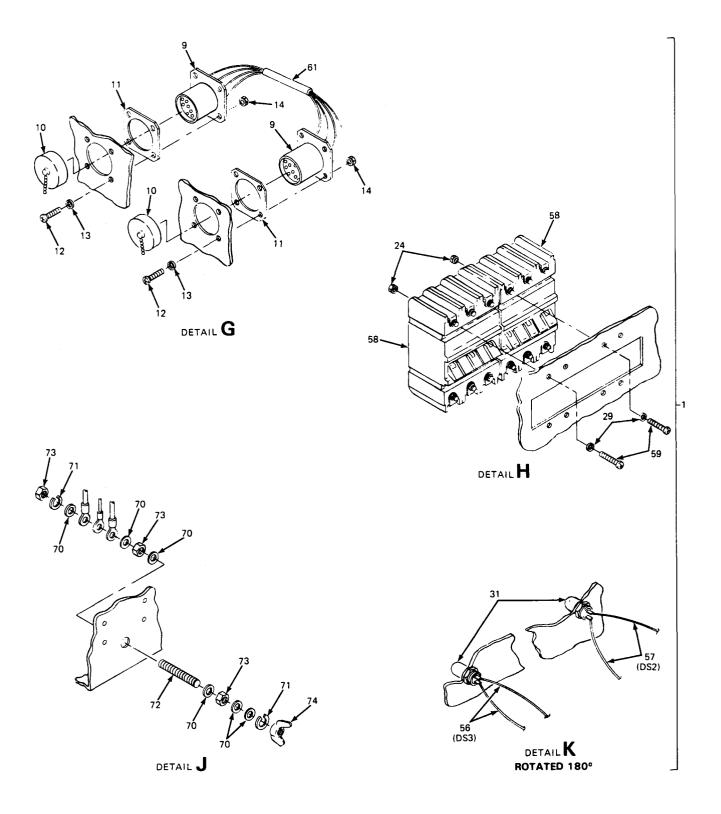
Five-Wire Switch Box Assembly (Sheet 3 Of 3).
